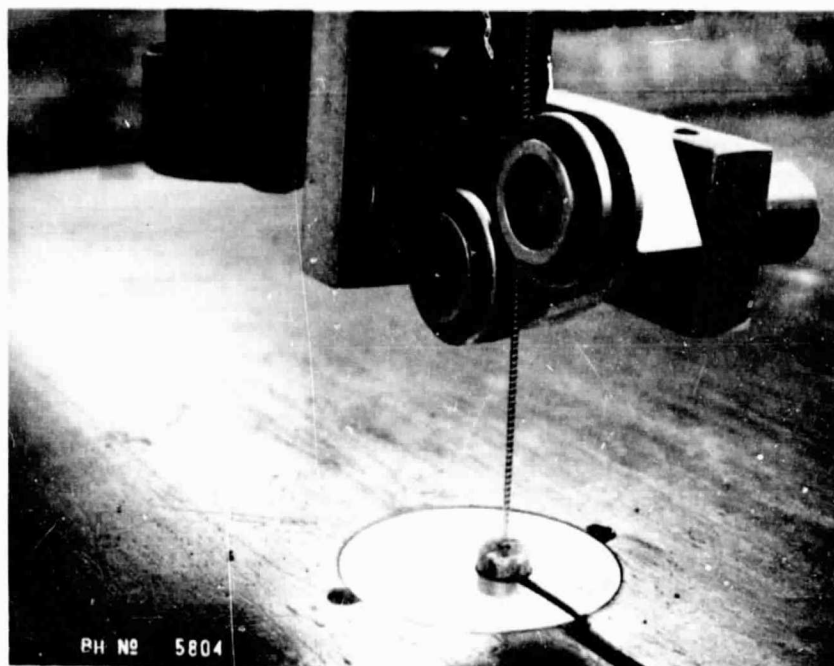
Bandsaw Equipped with Spiral (Tyler) Blade
